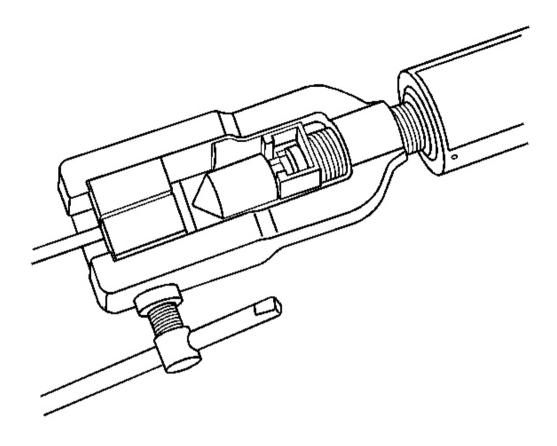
Using Pipe Flaring Tool Courtesy of GENERAL MOTORS CORP.
